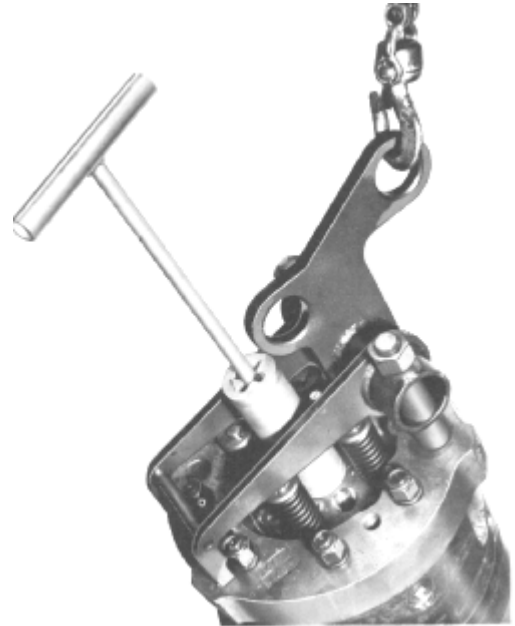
Power Assembly Removal 22115 With Lifting Clamp And Hoist
